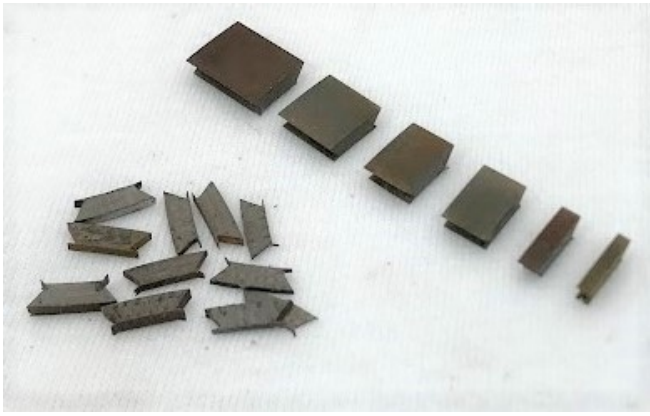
Electrical steel lamina separated from one another after wire EDM process with 1 in (25.4 mm) section laid out in a row on the right.
